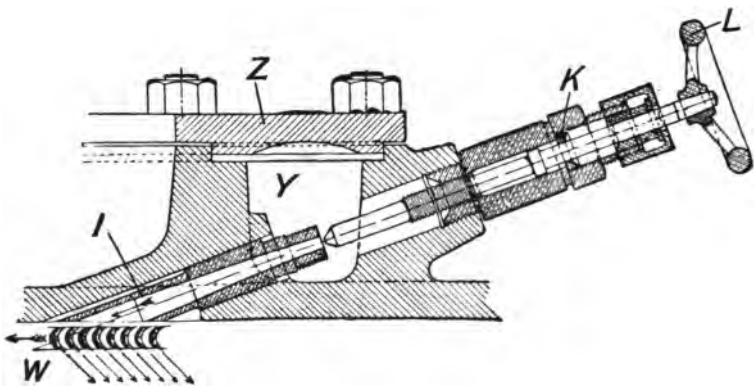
Nozzle and Vanes of a De Laval Turbine.
